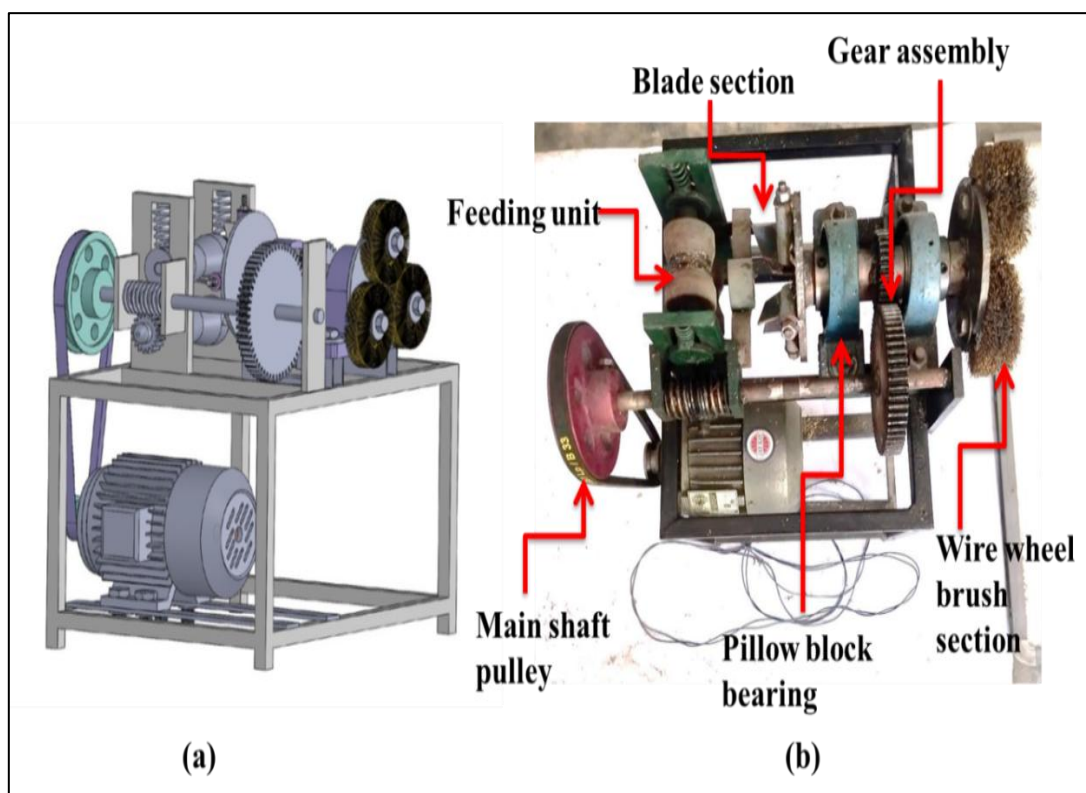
(a) 3-D CAD view of sugarcane peeling machine, (b) Actual view of sugarcane peeling machine
